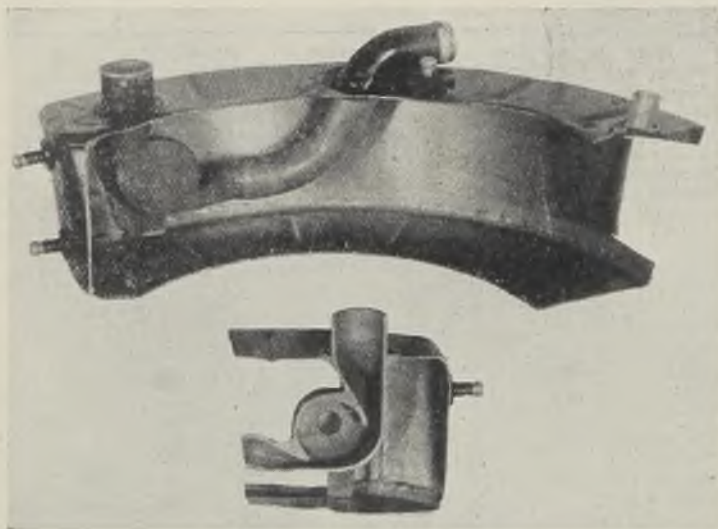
SHOWS THE HEADER TANK AND SWILL CHAMBER CASTING AFTER SECTIONING.
